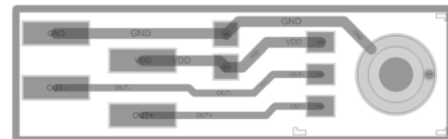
EV\_ICS-40720-FX Board Layout (Top View)
